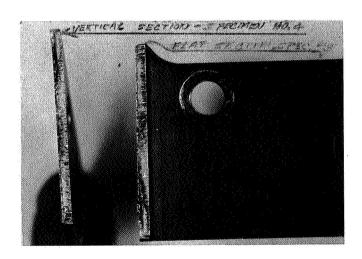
Failed Mirror Mounting Bracket (Note black residue on fracture surface)
